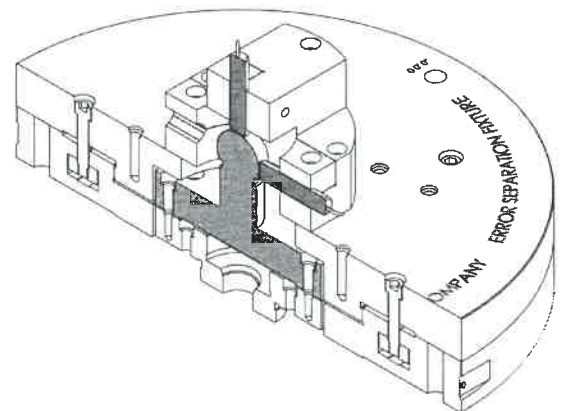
Sectioned view of the radial multiprobe error separation tooling.
